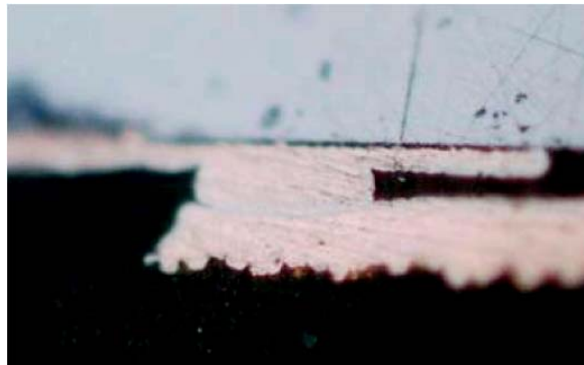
Cross-sectional image showing proper bump-to-pad deformation of a BT assembly with NCF
